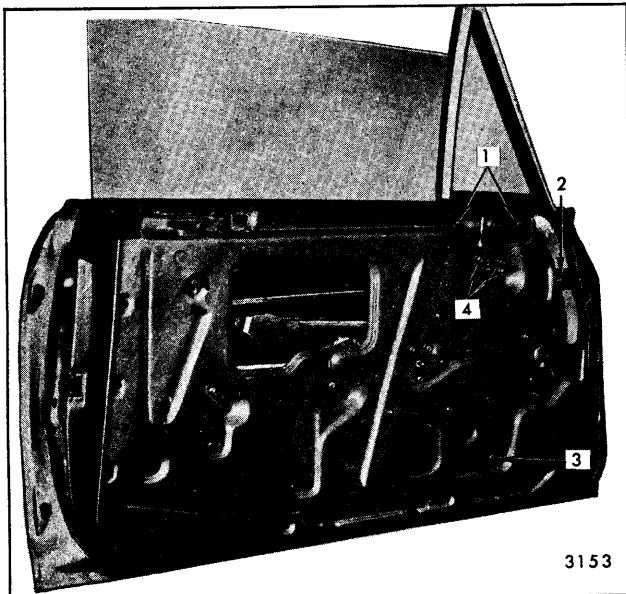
Front Door Ventilator Assembly Removal and Adjustment "A-39" Styles
